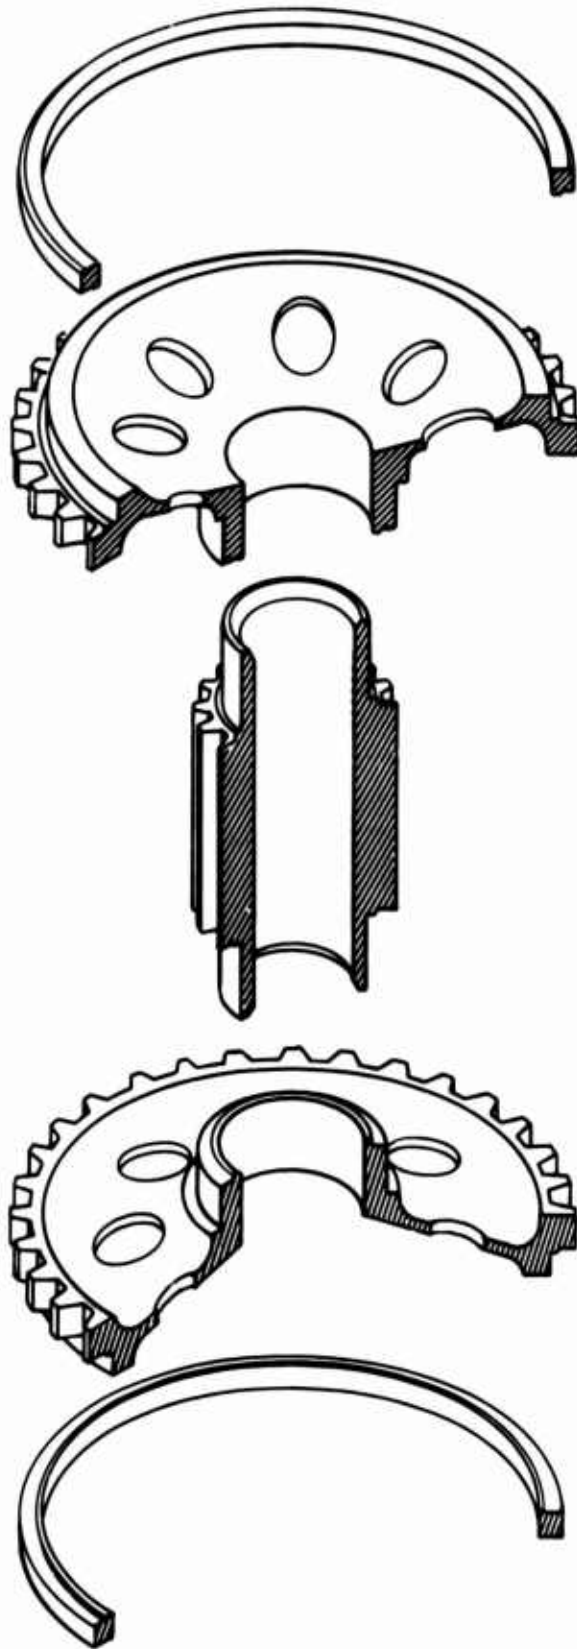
First-Row Pinion - Initial Configuration - Exploded View.
